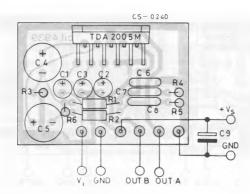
P.C. board and component layout of the circuit of Fig. 23 (1 : 1 scale)
